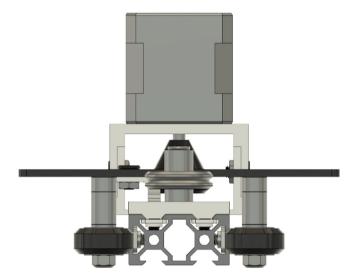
This CAD model illustrates the positioning of the wheels with respect to the rail. The design of the wheels was created so that they could roll on the aluminum without running into the MAKERLINKs or the bolts that hold them in place.
